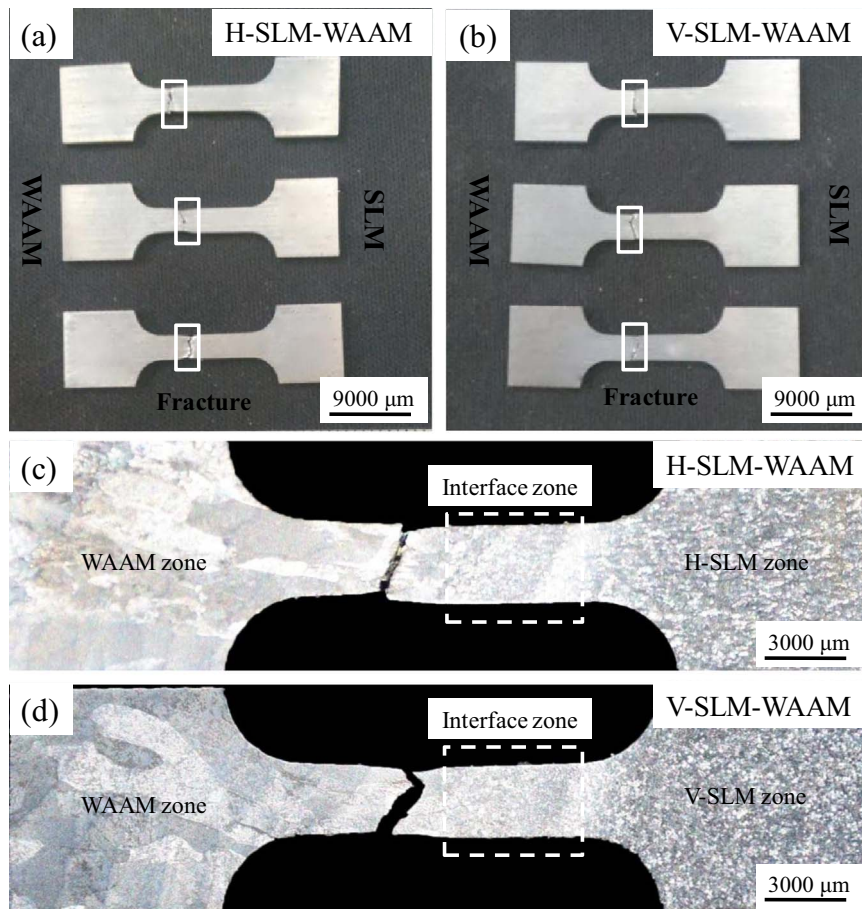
Hybrid-processed plate tensile samples: (a) horizontal SLM-WAAM, (b) vertical SLM-WAAM, (c) Optical macrostructure image of the fracture plate tensile specimens.
